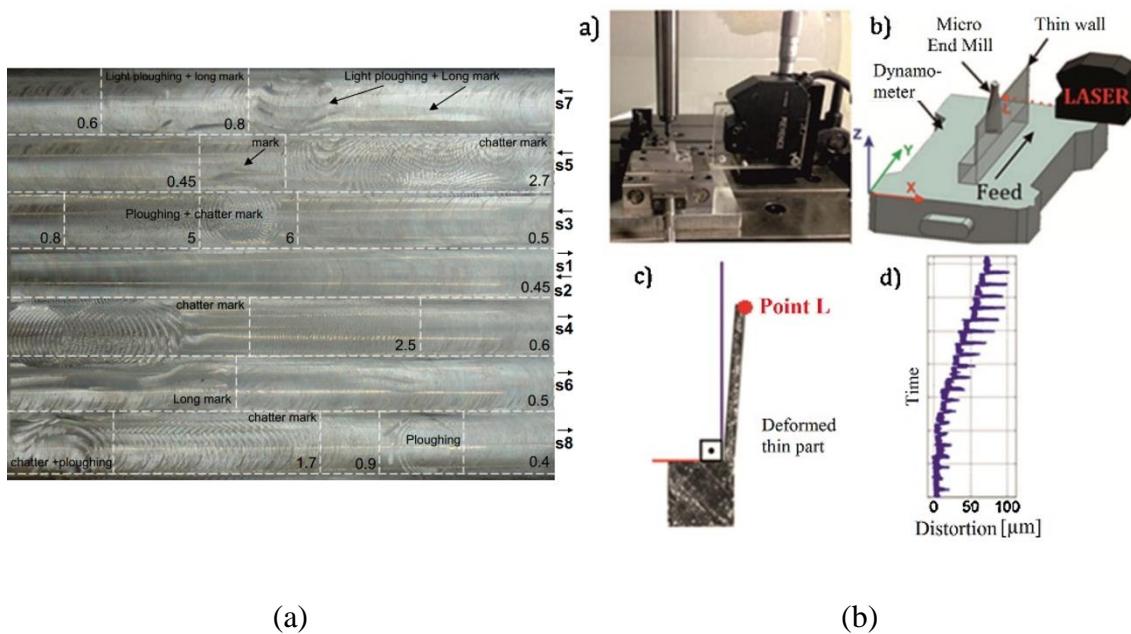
(a) Chatter marks on the machined surface when the cutting is unstable [26]; (b) Dimensional error caused by deformation in thin-wall milling process [27].
